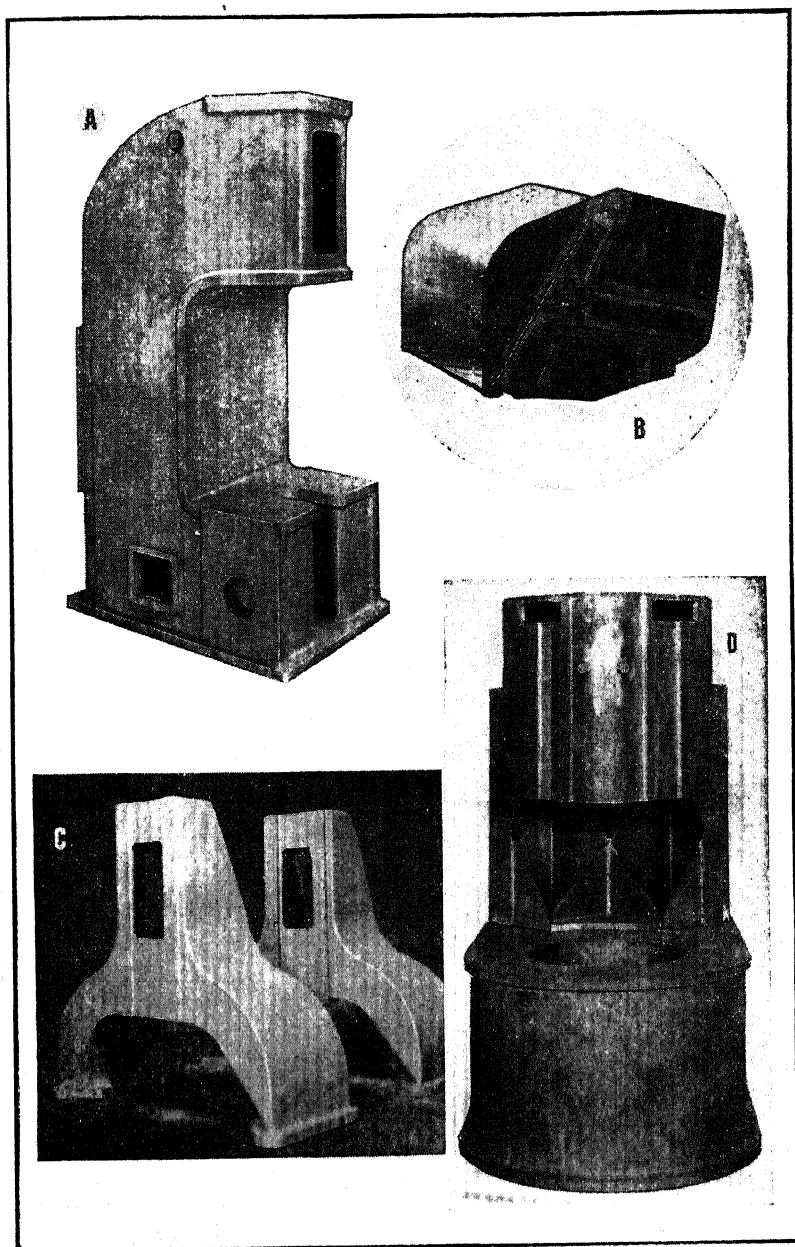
FRAMES—(A) 4,600-lb. frame for drilling machine. (B) High tensile steel pan for earth scraper. (C) 2,200-lb. columns for boring machine. (D) 2,500-lb. hydraulic press frame.
